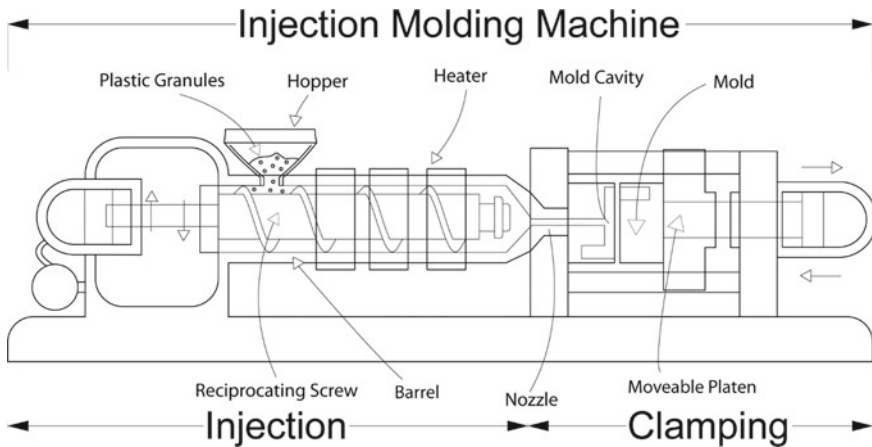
Injection molding machine scheme by Brendan Rockey, University of Alberta industrial design⁴
